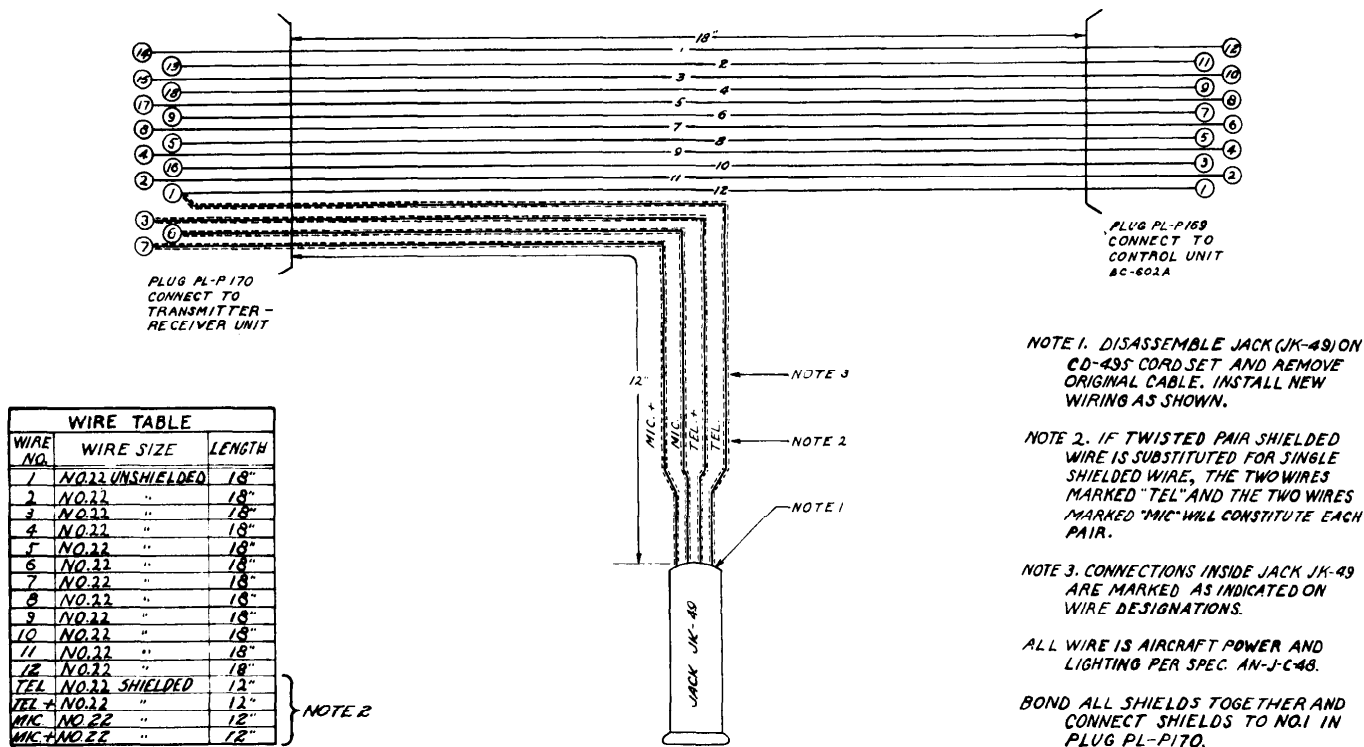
A — WIRING HARNESS FOR PORTABLE TEST UNIT
